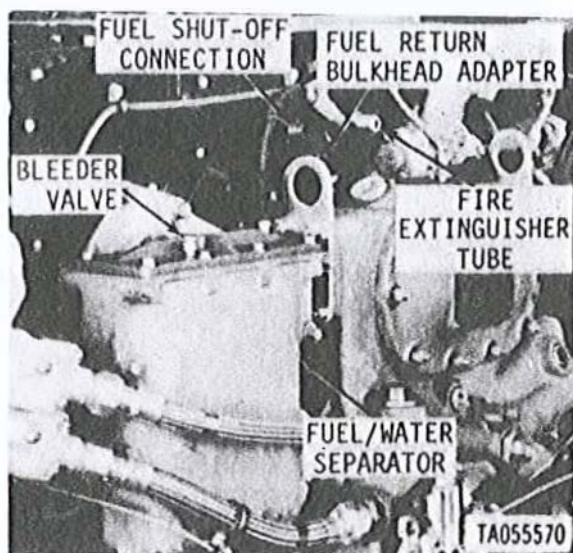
Engine connection points—left front view, model AVDS-1790-2DR engine.
